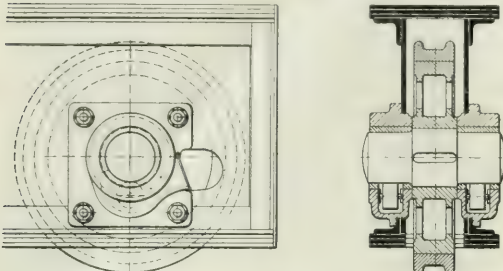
SELF-LUBRICATING AXLE BOX, BY ADAMSON & CO.
